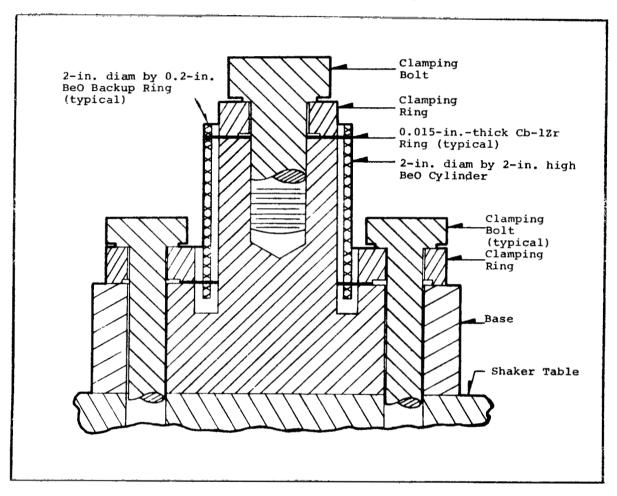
Schematic of Two-Inch Diameter by Two-Inch High Bore Seal Vibration Assembly Mounted in Vibration Fixture
